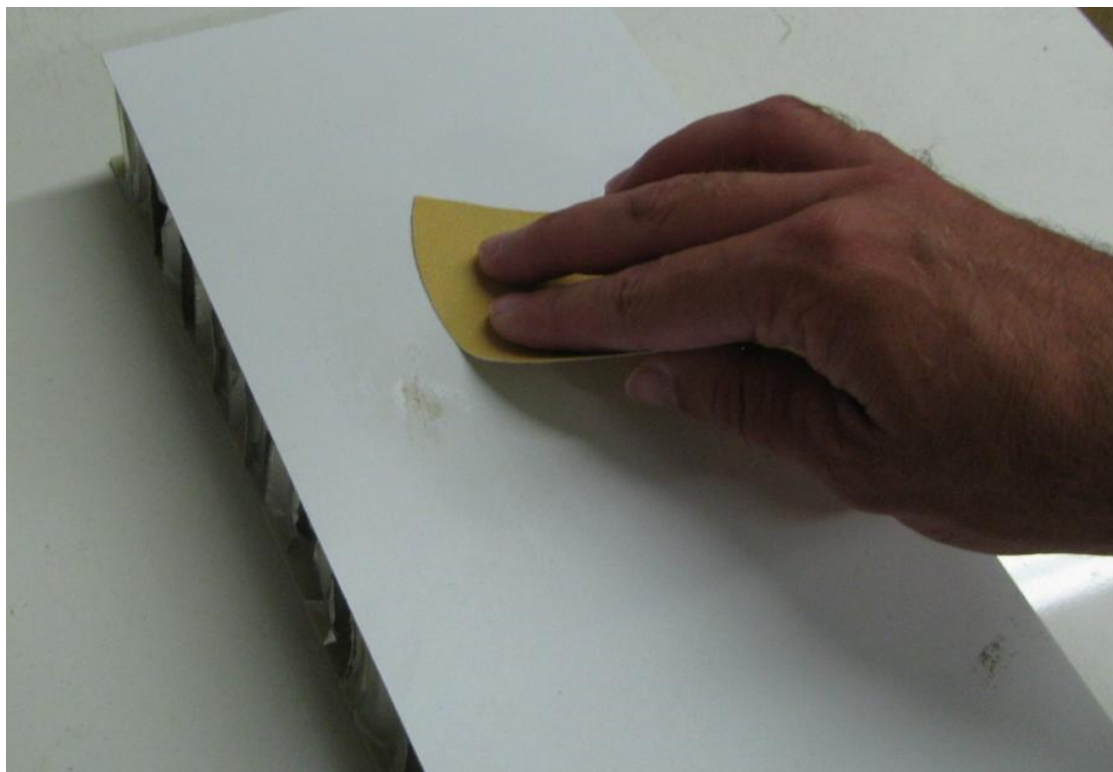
Sand damaged area to remove burrs and rough spots. Sanding also scuffs up finish to receive bondo.
